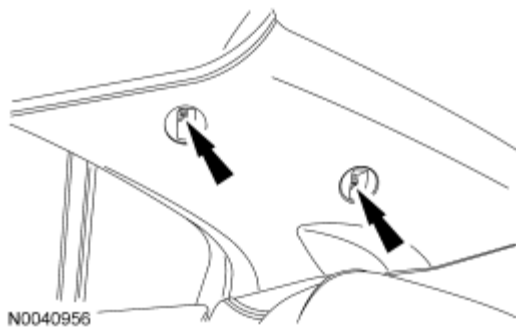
Locating RH C-Pillar Trim Cover And Retainers
